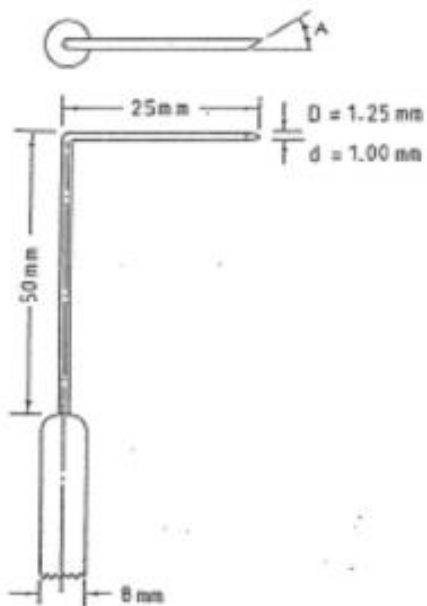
Slanted tube geometry for yaw angle measurement
